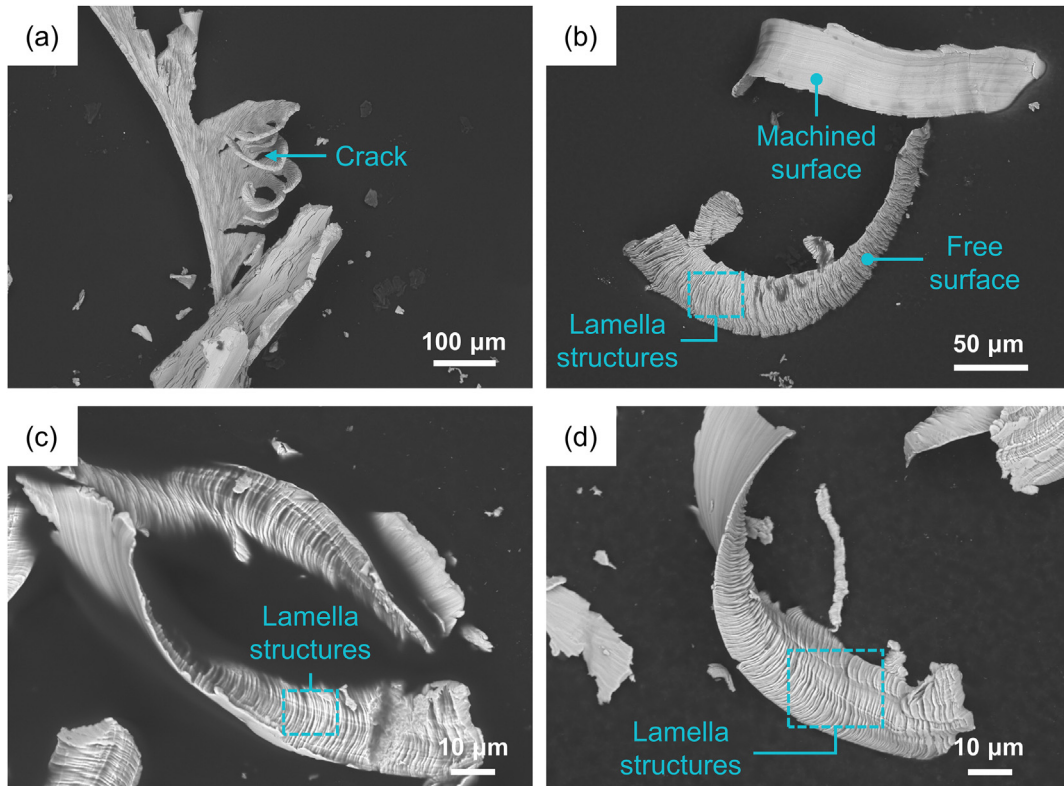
SEM images of chip morphologies under different machining conditions. (a) Rough machining of the mirror surface, (b) finish machining of the mirror surface, (c) micro-groove array machining, and (d) micro-pillar array machining.
